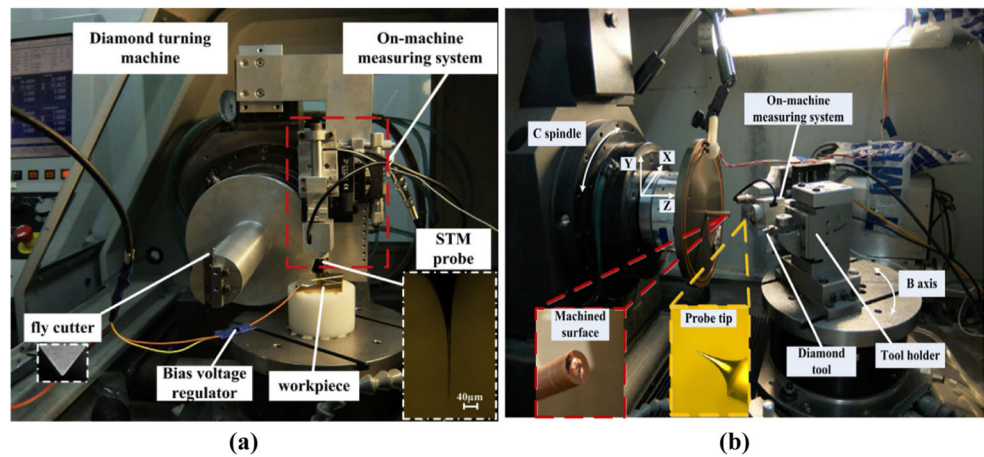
a STM on-machine measurement applied in fly-cutting of V grooves [31]. b In-tool servo machining of 3D compound eye structures [32]
